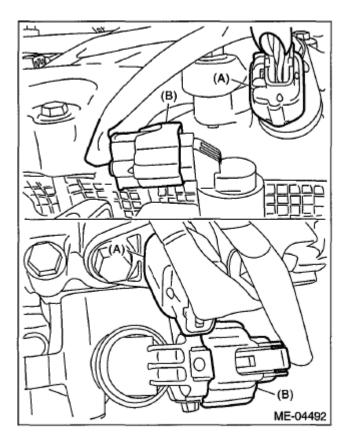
Identifying Exhaust Camshaft Position Sensor And Exhaust Oil Flow Control Solenoid
